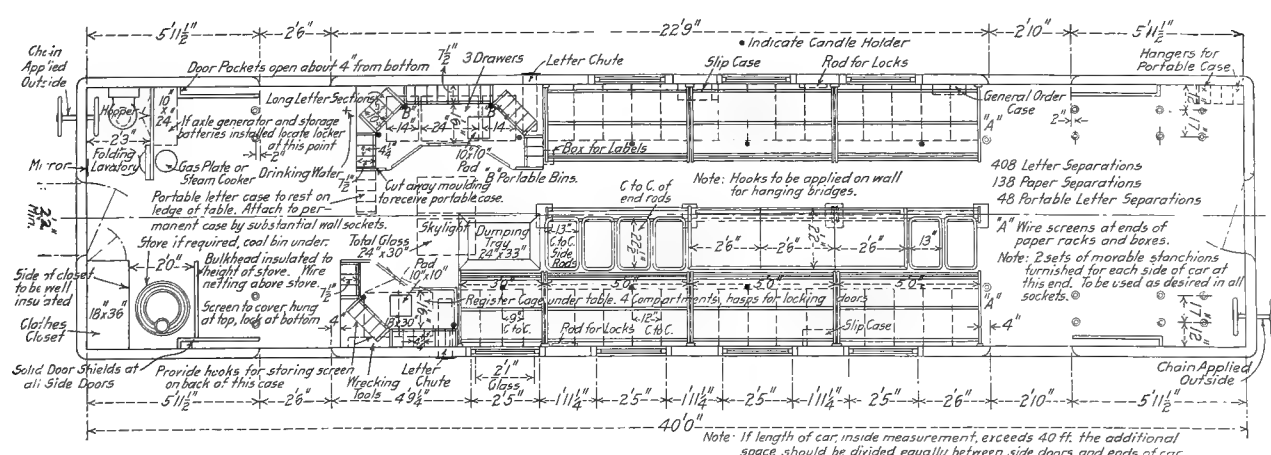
Floor Plans Showing U. S. Government Requirements for 40 ft. Postal Car.
